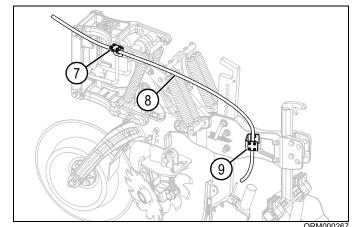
Adjustable Liquid Tubes (wear plate removed for clarity)
